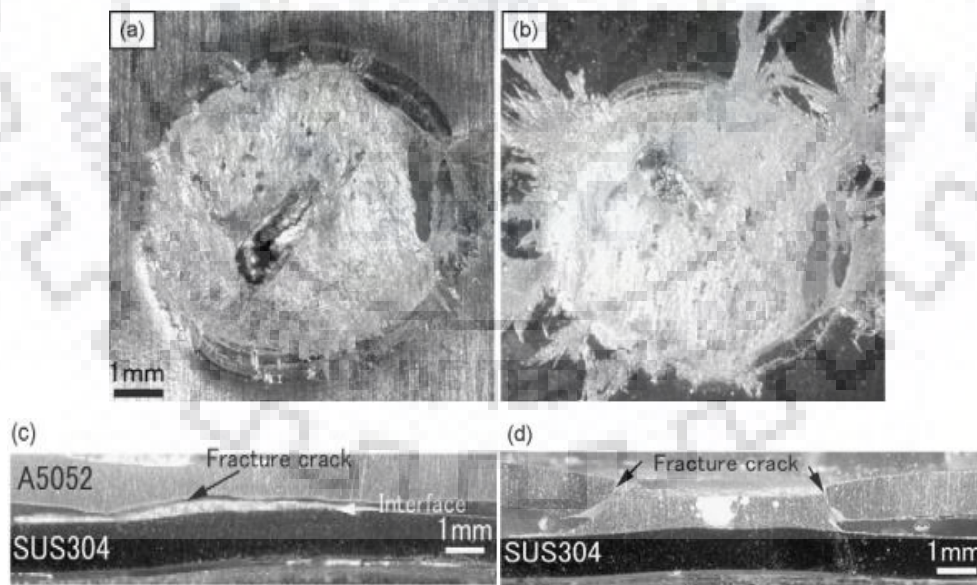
(a) A5052 side, (b) SUS304 side fracture surface and (c) cross-section of shear fractured of A5052/SUS304 joint (d) cross- section of plug fractured of A5052/SUS304 joint (Qiu et al., 2009) [5].
